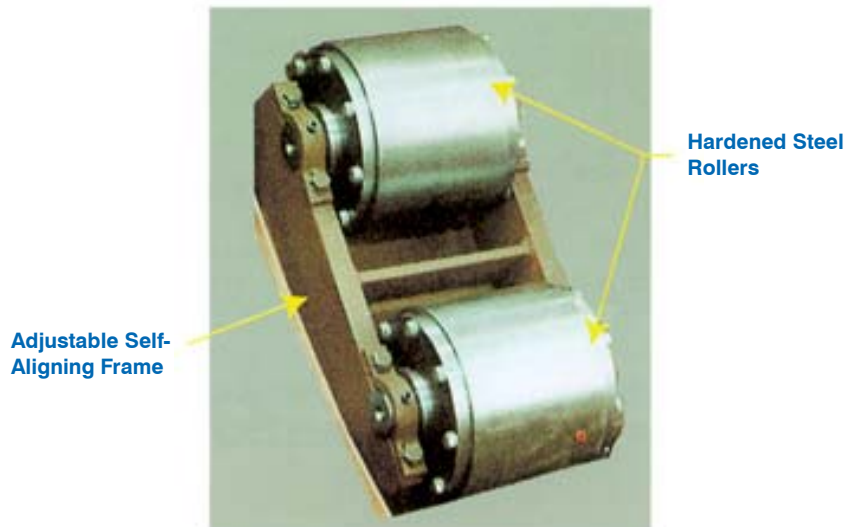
Figure C - Lower bearing assembly for Type C enclosed screw pumps.
